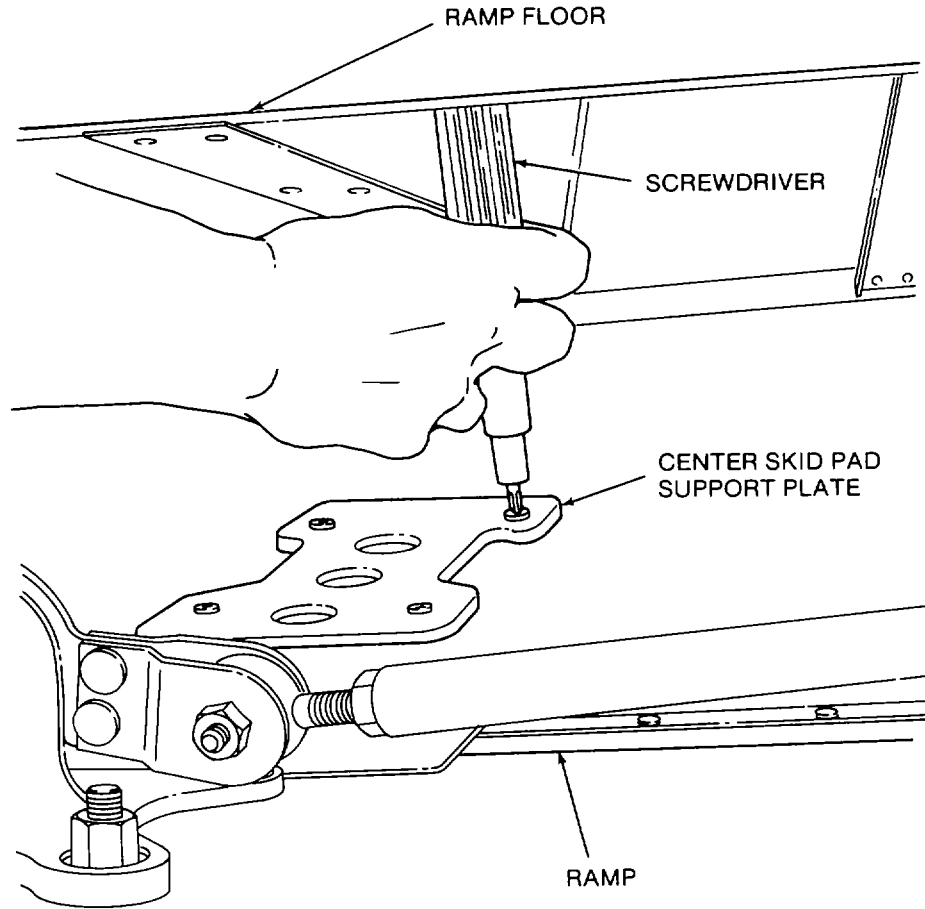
Screwdriver Location to Hold Center Skid Pad Screw Head
